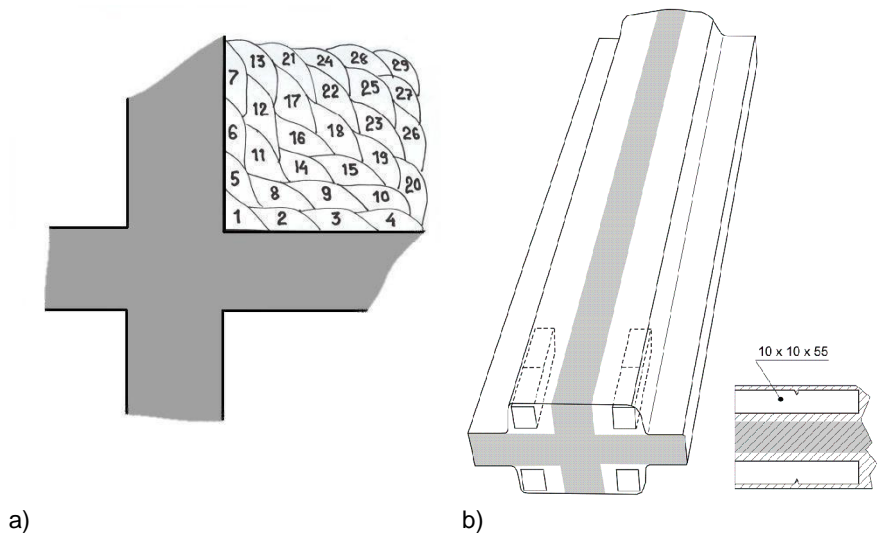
Welding sequence of the all-weld metal test block Alloy 182 in a) and a schematic illustration that shows extracting of the specimens from the test blocks in b).
